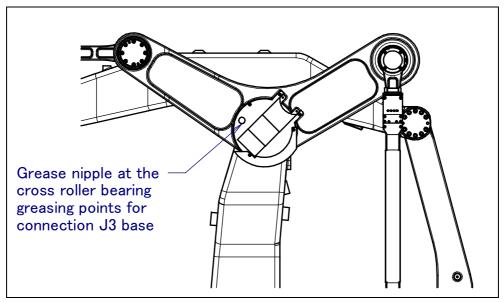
(c) Greasing for cross roller bearing J3 base
